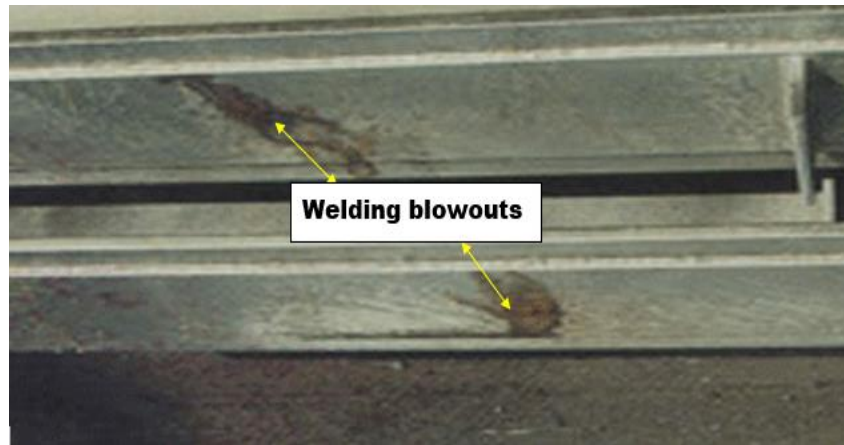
Welding Blowout (AGA, 2016); (IGA, 2013)
